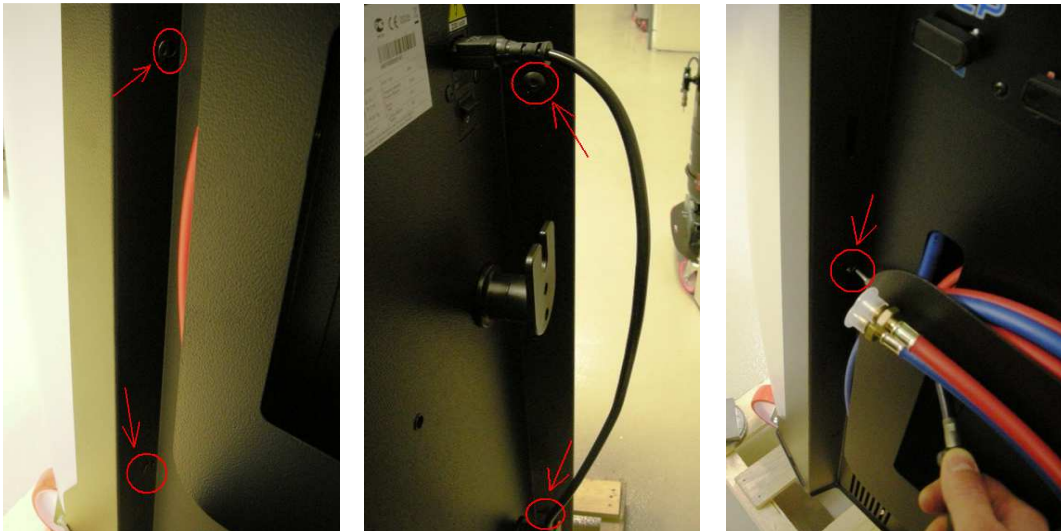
Removal of the four screws on the rear side of the Konfort unit
